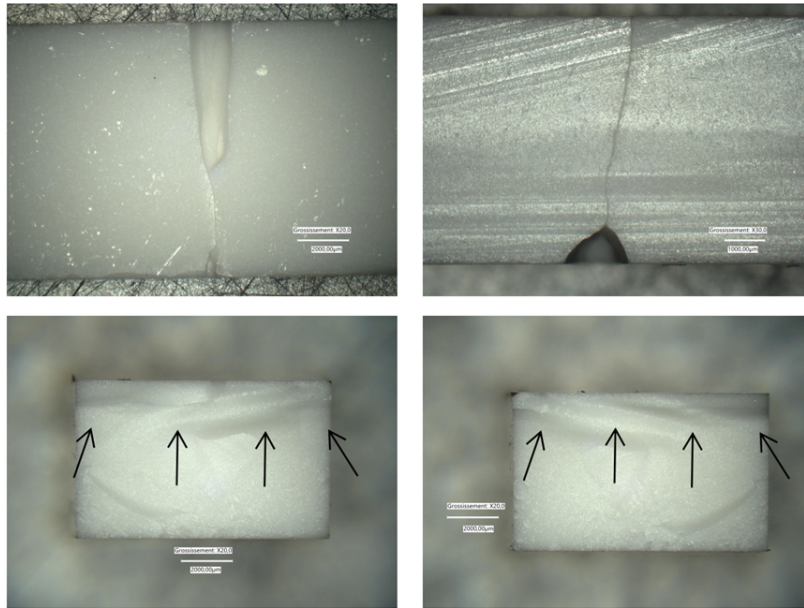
Compression curling specimen 5. The load is applied to the upper side of the specimen.
